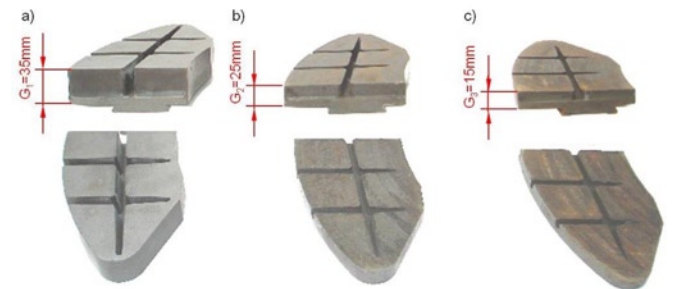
View of the brake pads used during the tests: a) new brake pads, 35 mm, b) pads worn to 25 mm, c) pads worn to 15 mm
